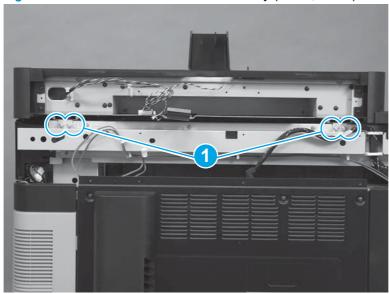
Remove the scanner assembly (M880; 1 of 7)
